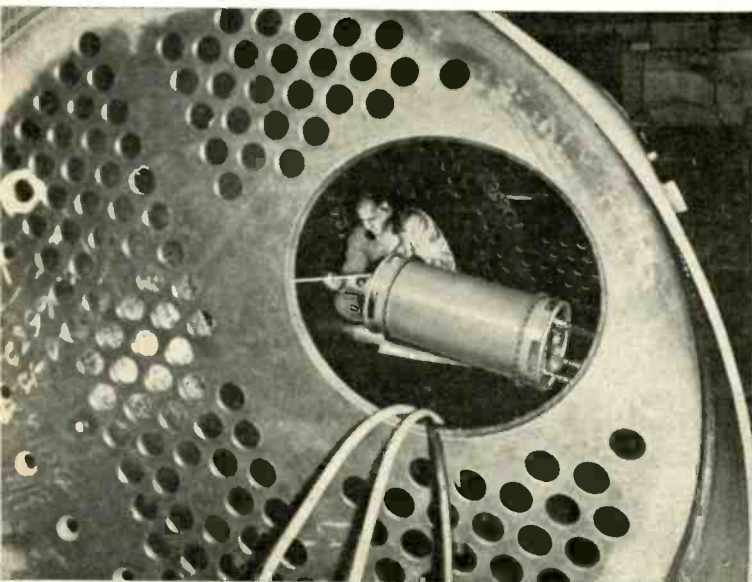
A self-contained industrial radiographic machine is used here to look for material defects in aircraft engine parts.
